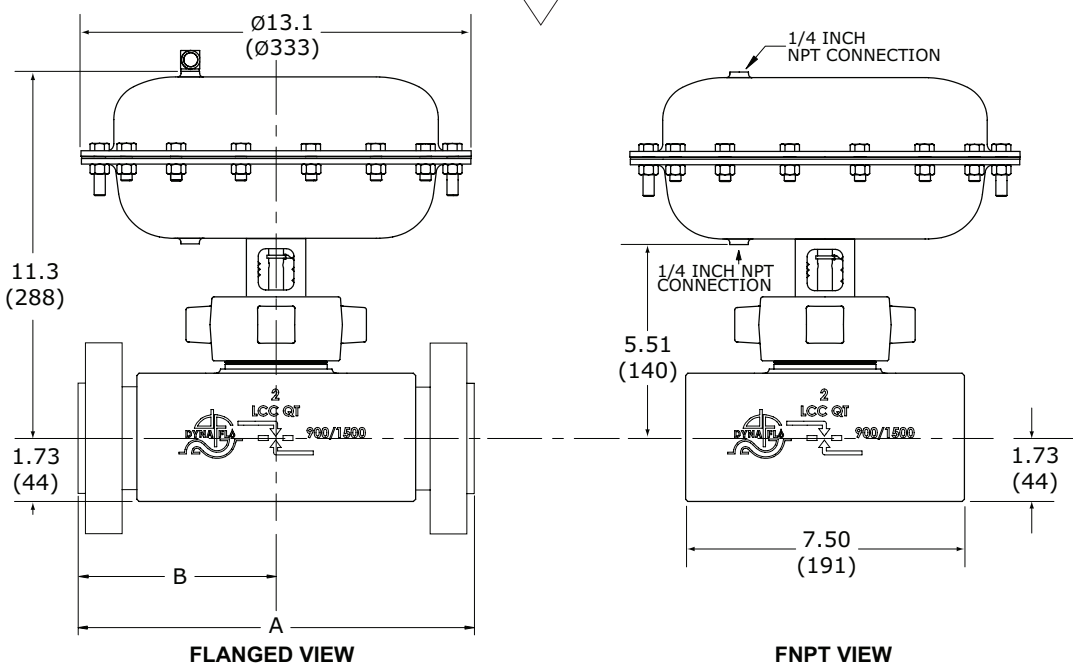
DF270 2 inch Control Valve Dimensions inch (mm)
